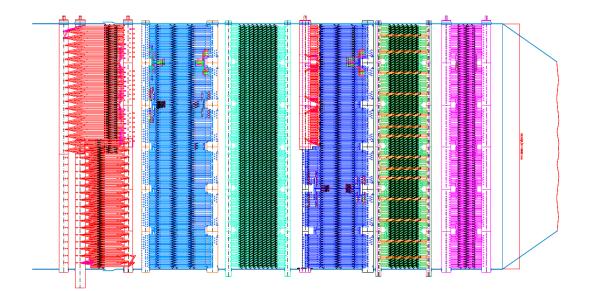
HRSG Tube Bundle Layout Drawing (Other View)
